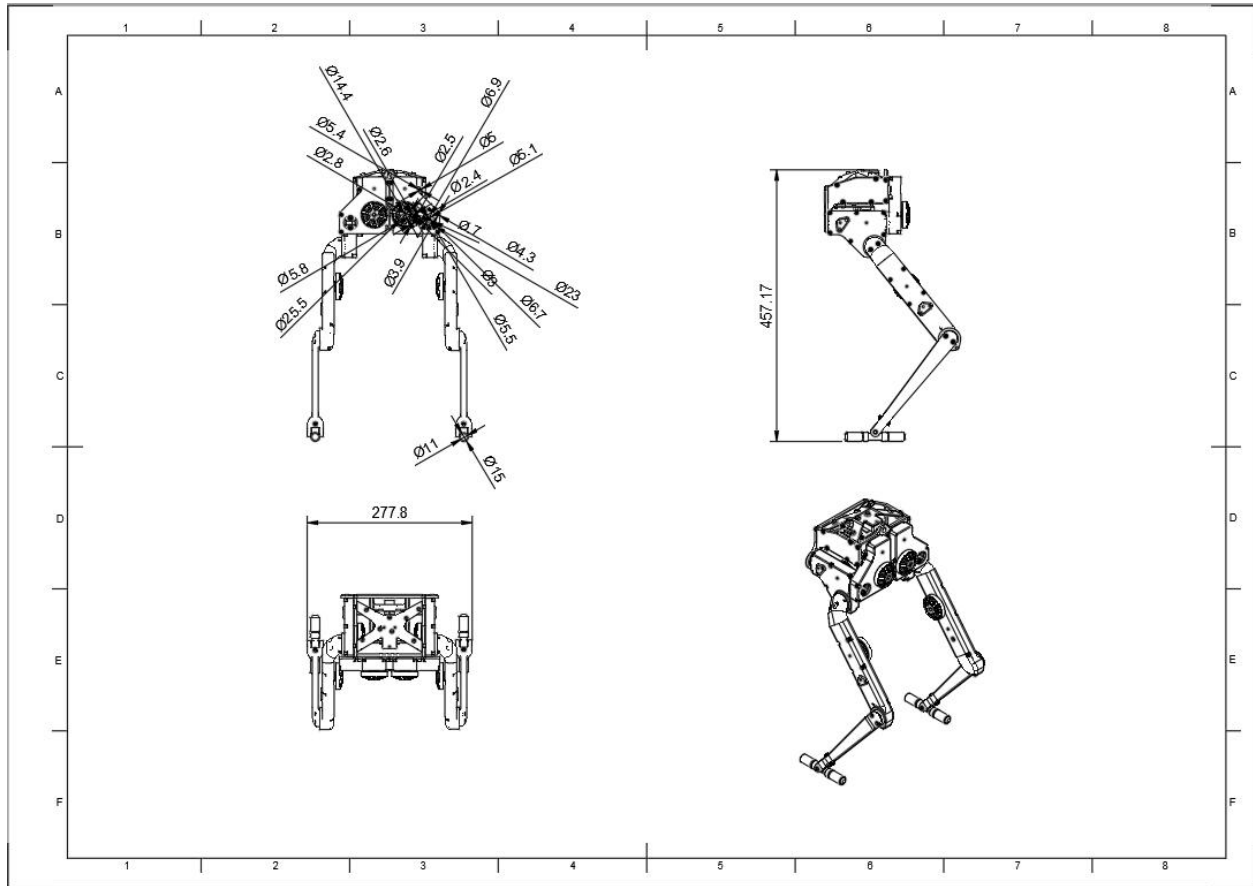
The CAD drawings and corresponding mechanical dimensions for our bipedal robot.
